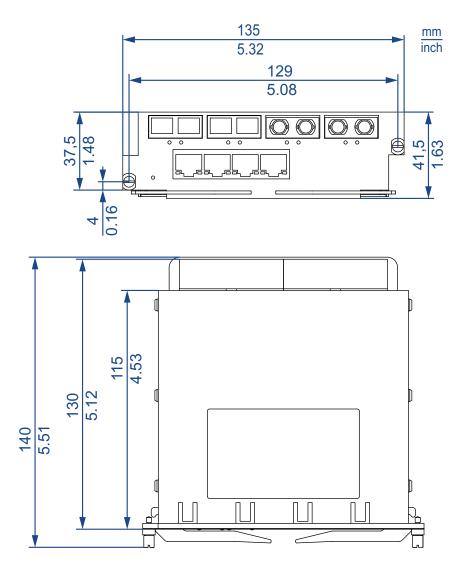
Media modules: Dimension drawing media modules (exemplary)
